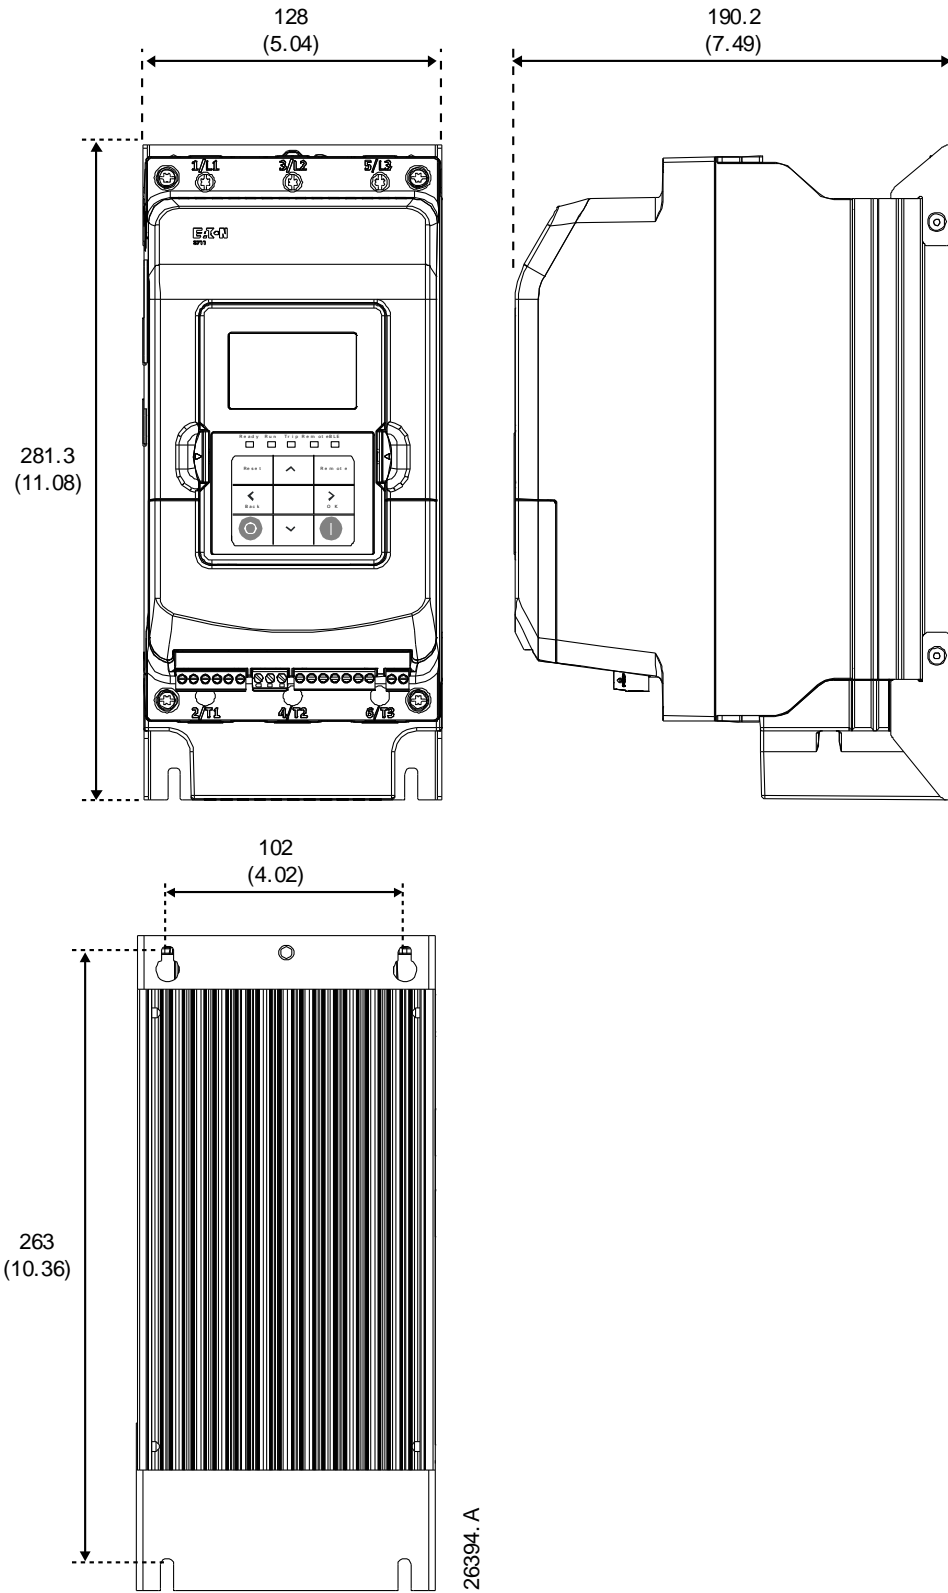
Frame size 2 (S711-34062...~ S711-34115...) dimensions
